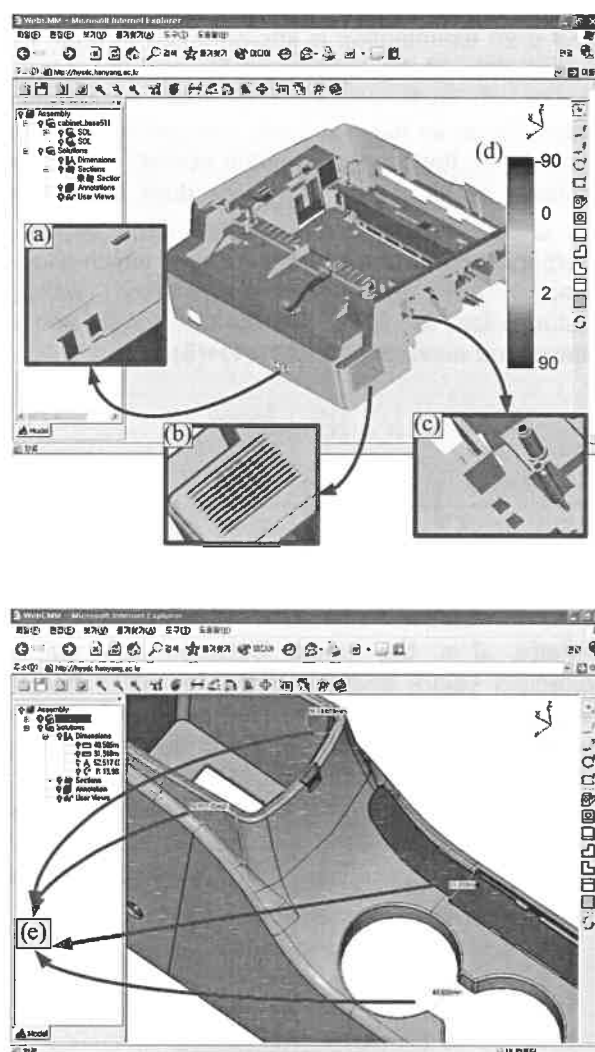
Draft examination of a printer and dimensional check of a center console on the CAD viewer (WebCMM) over the Internet.
